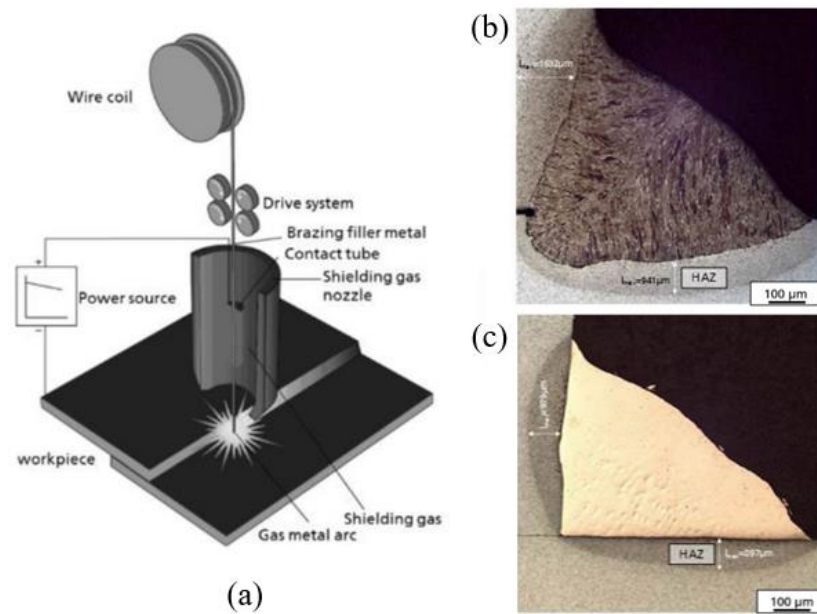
(a) Schematic of the GMAB process; (b) cross-section of regular fillet weld; (c) cross-section of the brazed seam. Obtained from Andreazza et al. [25]
